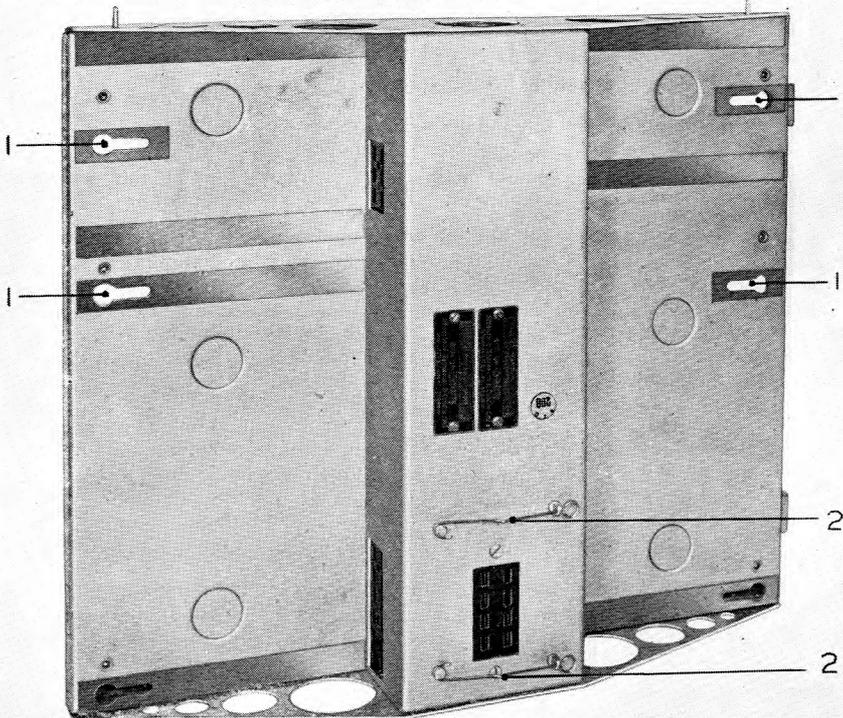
VIEW OF UPPER SIDE OF CHASSIS
